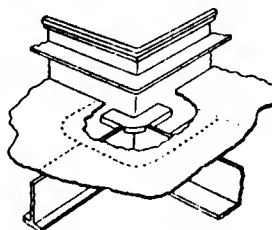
Outside View of Hatch Corner in Upper Deck of Earlier Liberty Ship Shows Original Design Including 51-Lb. Doubler Beneath Deck and Welding Around Insert Plate
